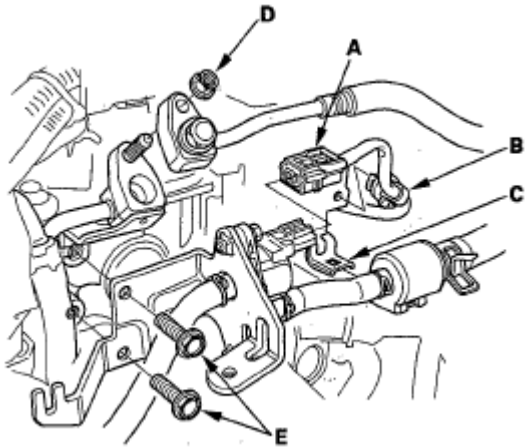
Locating Purge Control Solenoid Valve Connector & Harness Clamp
